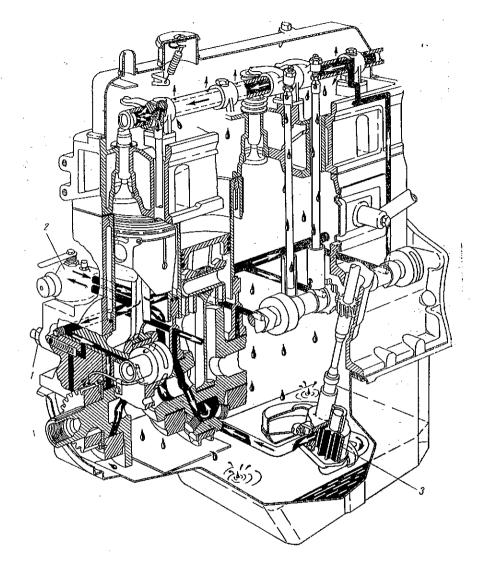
Engine Lubrication Diagram: 1 - relief valve; 2 - coarse oil filter; 3 - oil pump
